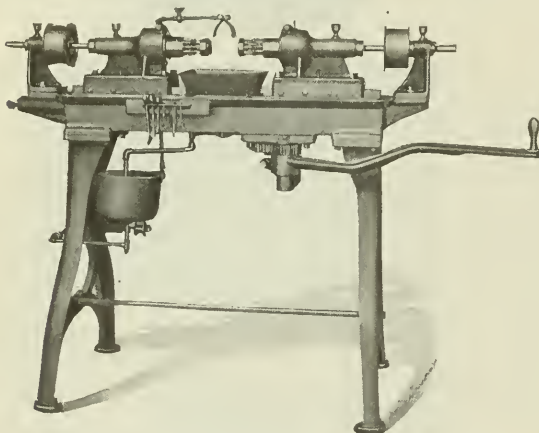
Langelier Double-acting Horizontal Multiple Drilling Machine
